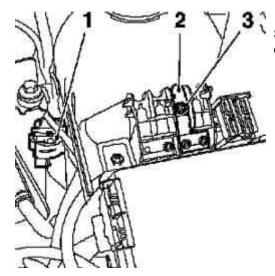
Wiring harness Steering: 1 - the wiring harness connector, 2 - nuts, 3 - positive lead
